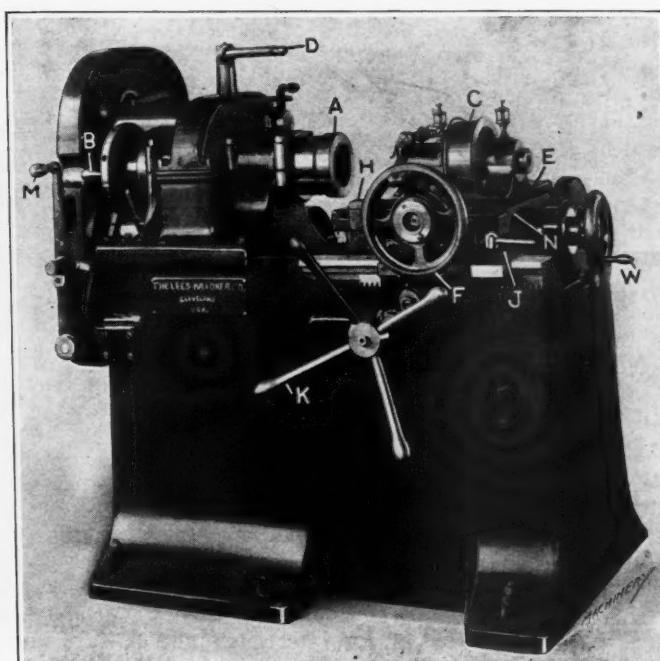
Lees-Bradner Collet or Multiple-cutter Type of Thread Milling Machine
